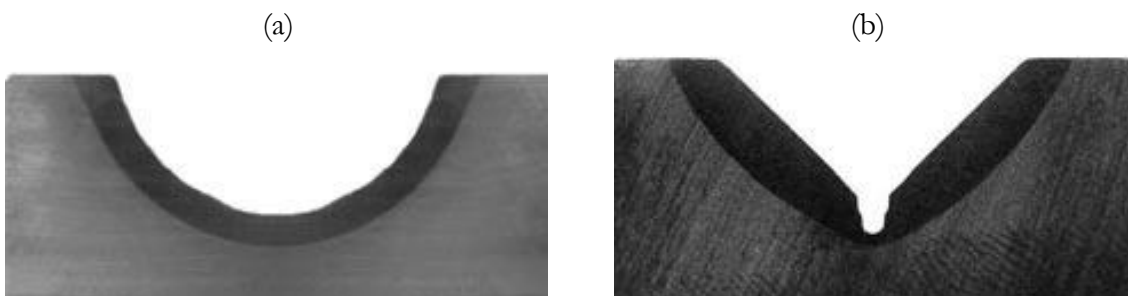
Parts of a four-point contact slewing bearing.
